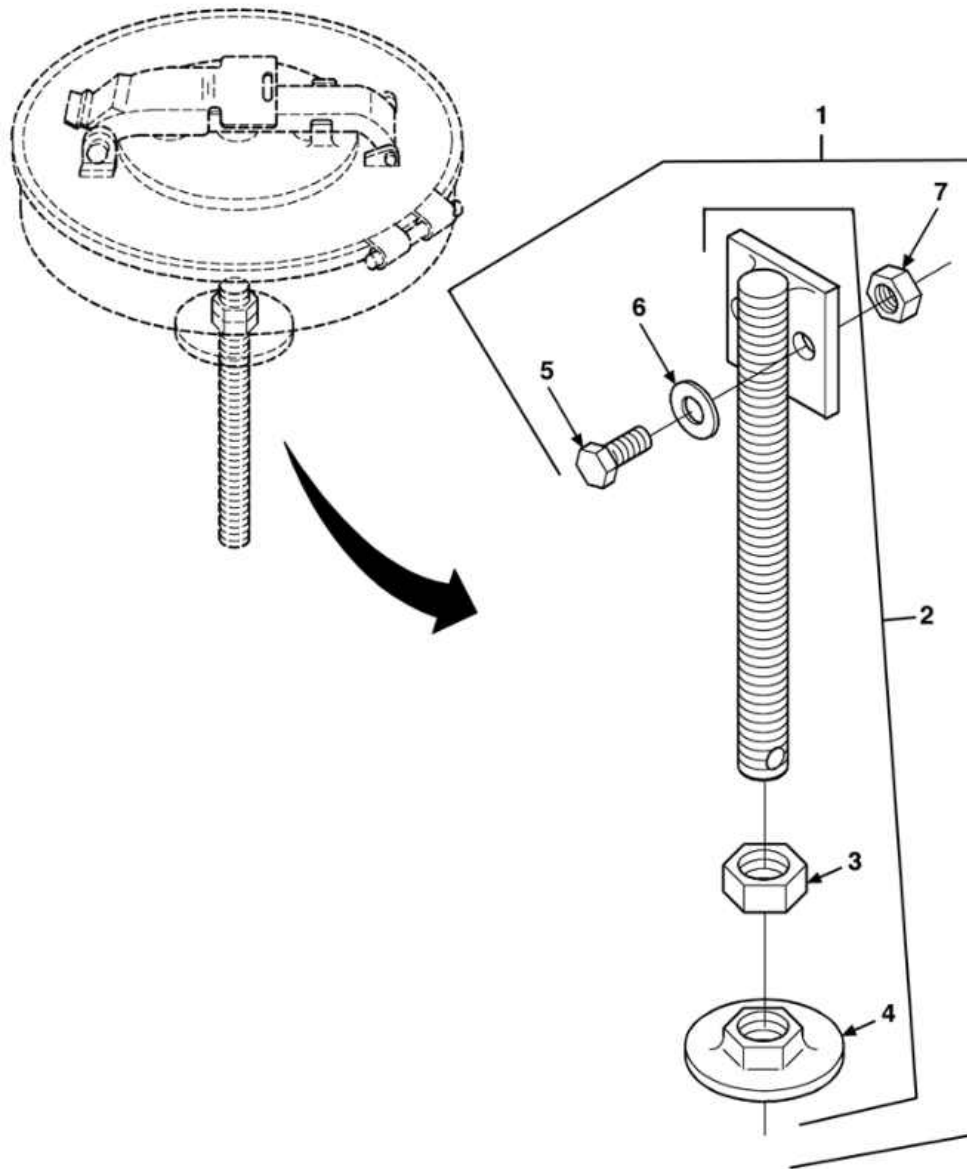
GAGE ASSEMBLY, IN-TANK
